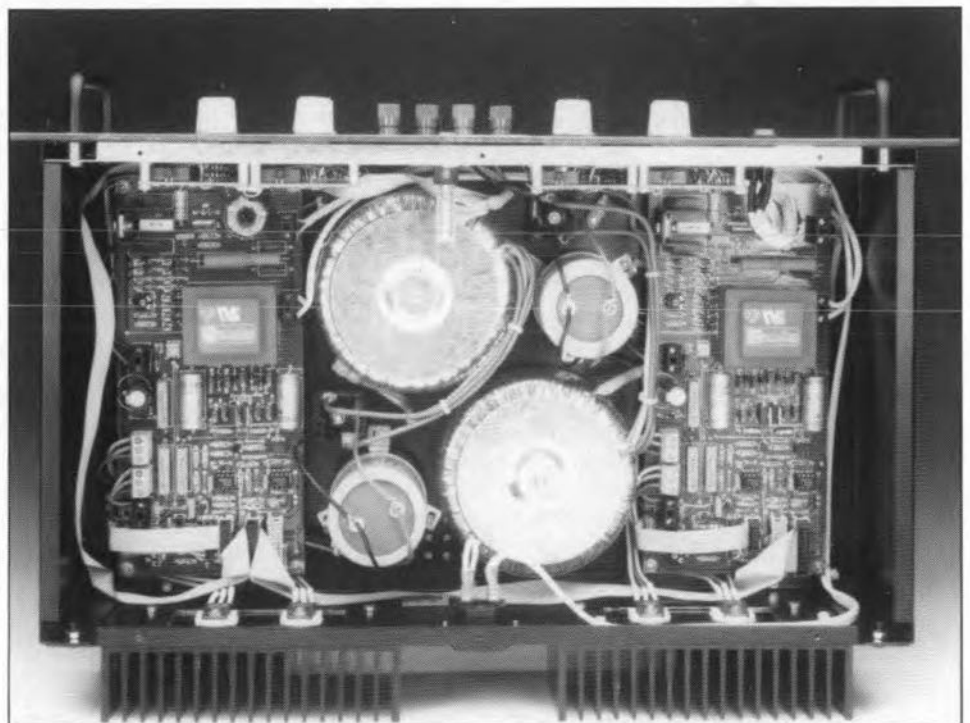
Inside view of the PSU showing the wiring and the component arrangement on the bottom plate of the 19-inch enclosure.
